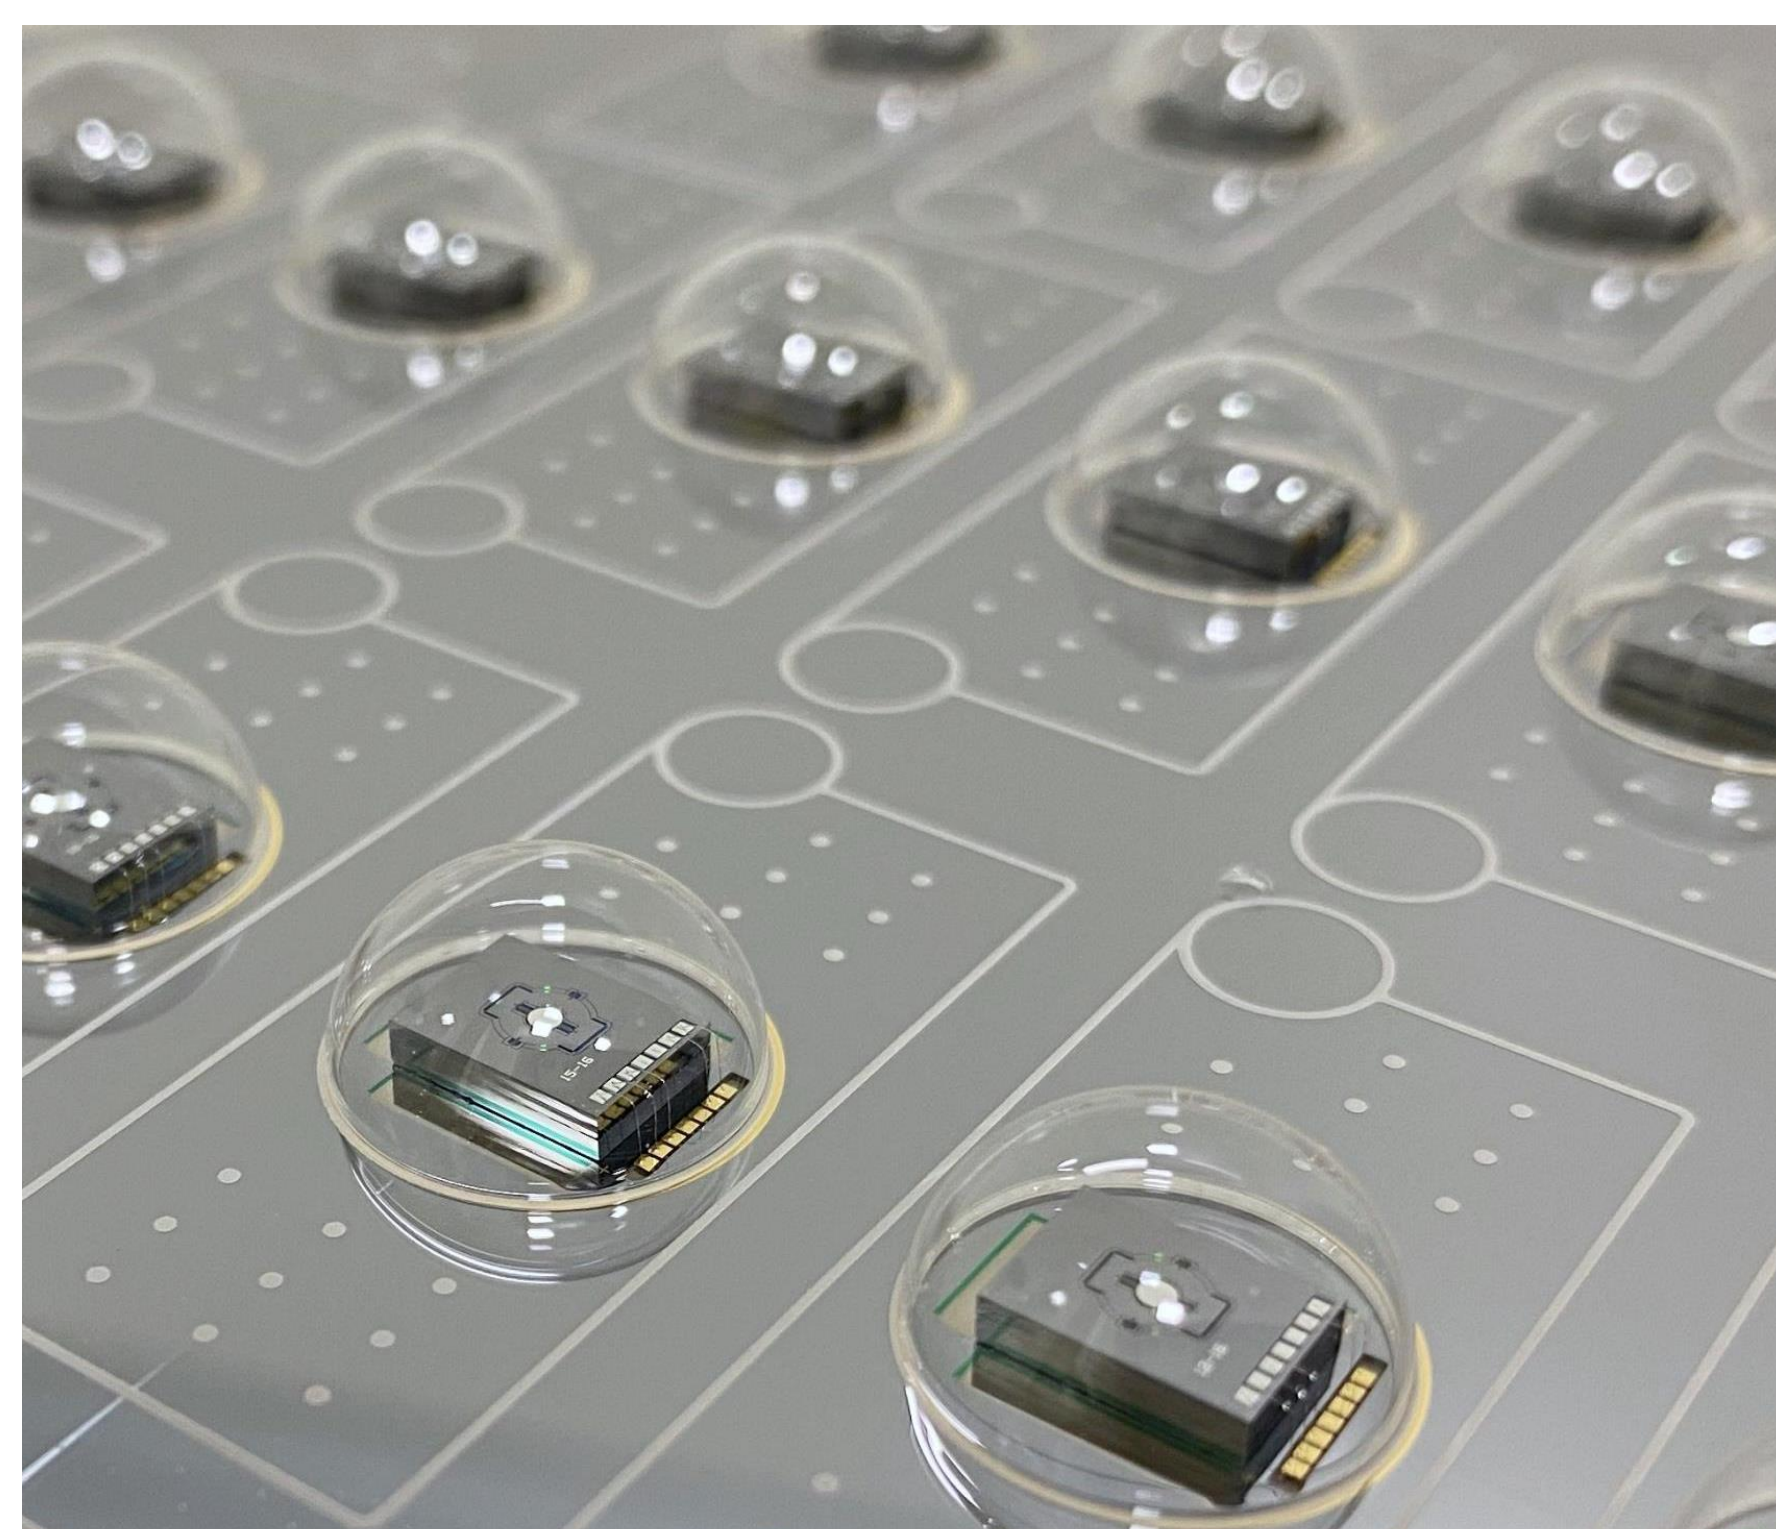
Completely assembled 8" wafer. Capping at wafer level.
